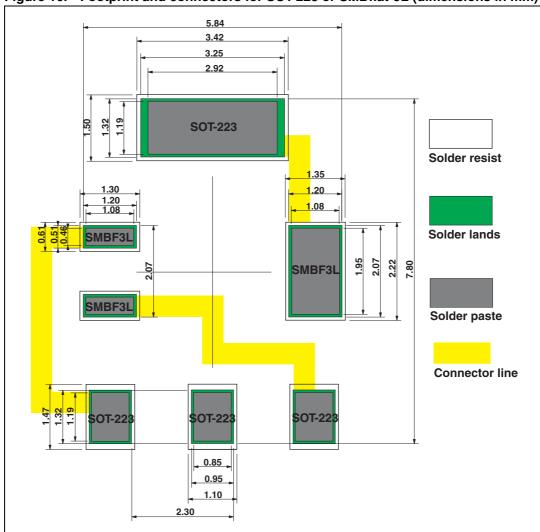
Footprint and connectors for SOT-223 or SMBflat-3L (dimensions in mm)
